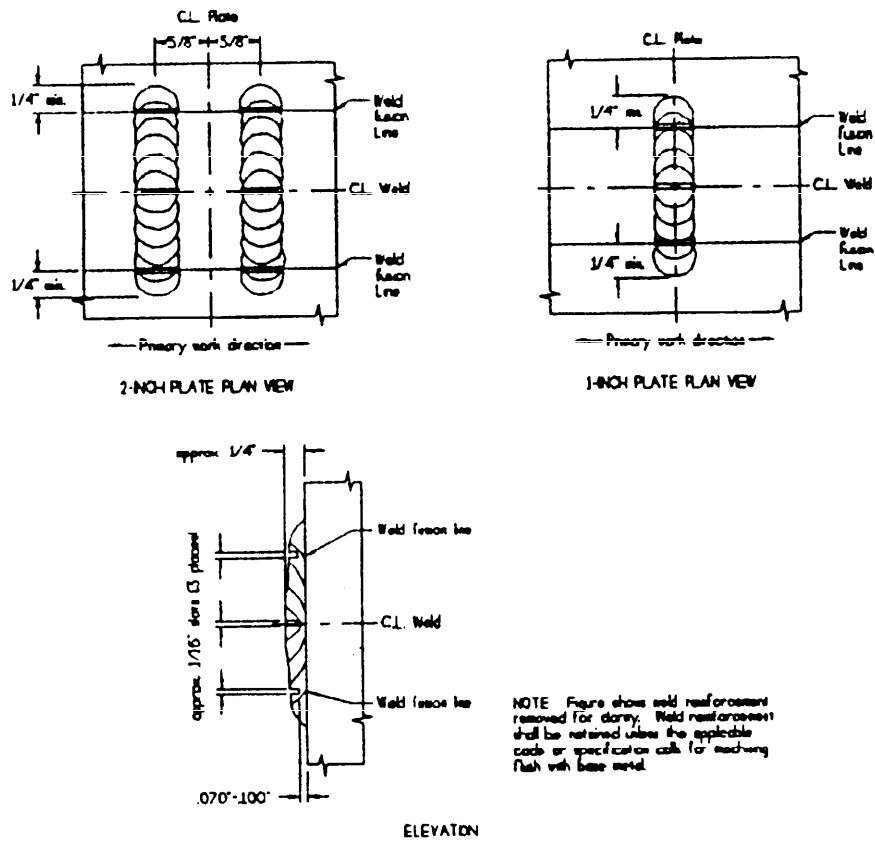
WELD METAL AND WELD PROCEDURE EVALUATION
